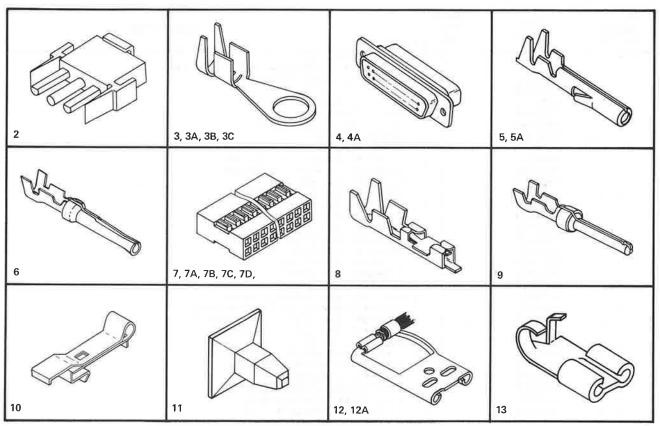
CABLE ASSEMBLIES WITH COMPONENT PARTS. SEE LIST 16.
